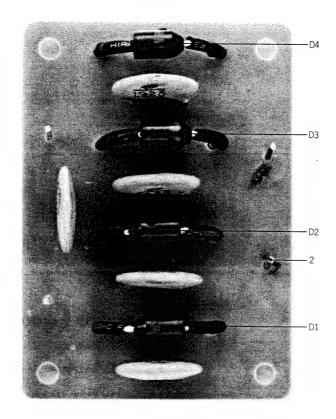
PHOTO OF REGULATOR P.C. BOARD (98-5084) BLOCK
